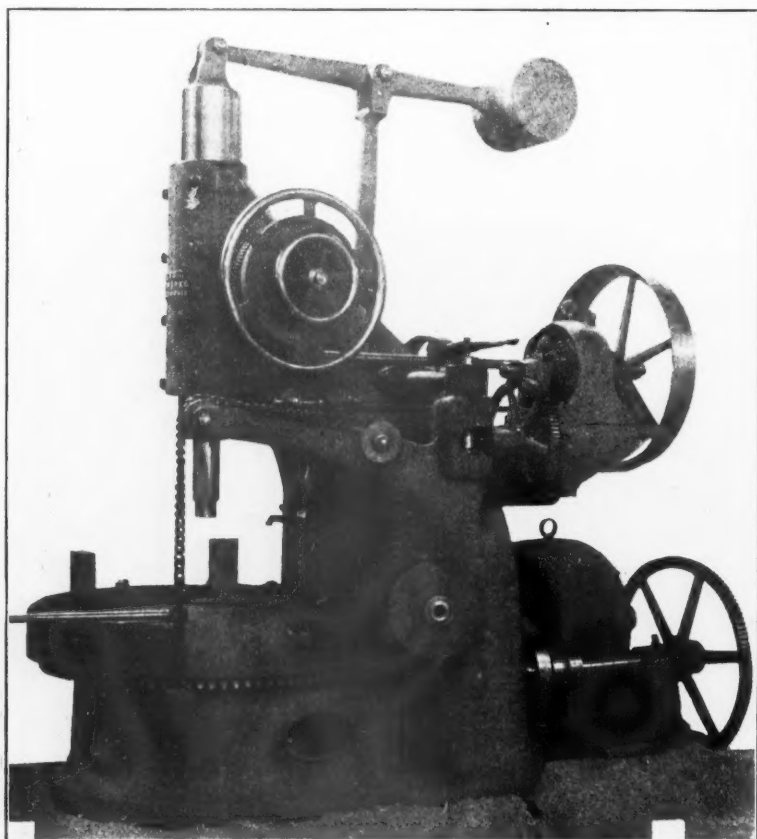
The Niles-Bement-Pond 42-in. Car Wheel Boring Machine.
